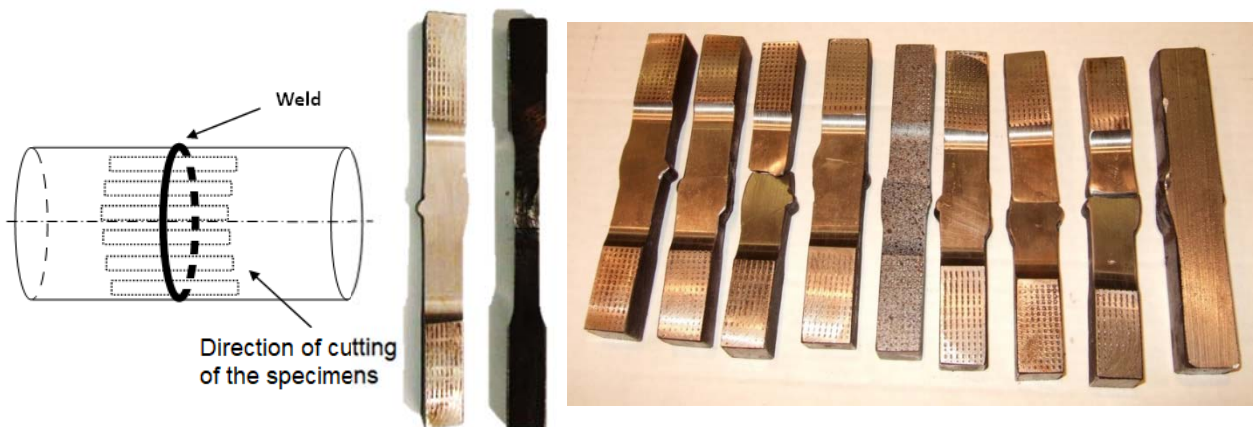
Cutting specimens from welded pipes, their final shape and specimens after the cyclic tests.
